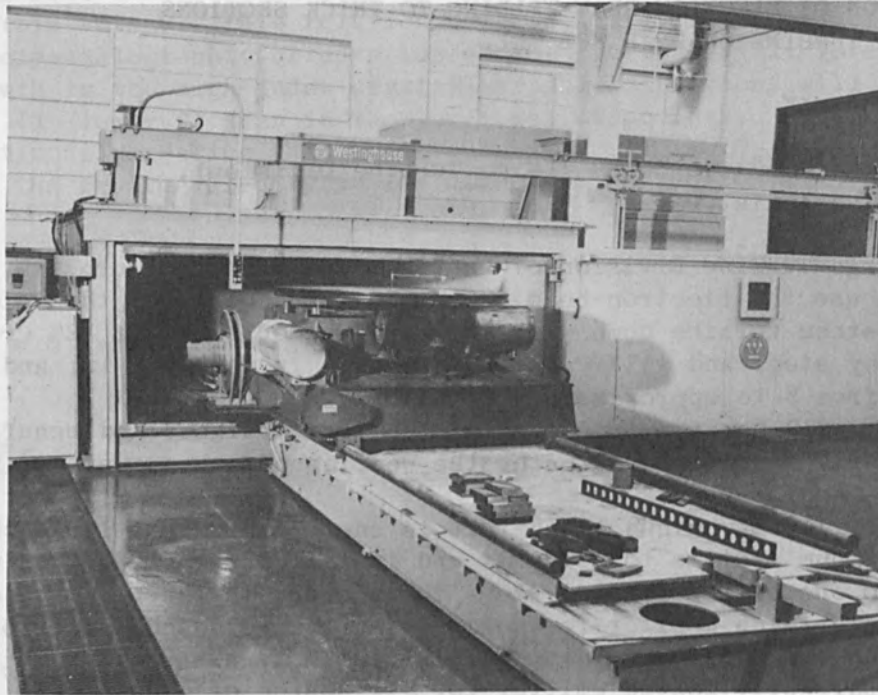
Partial-vacuum EB welding facility.
